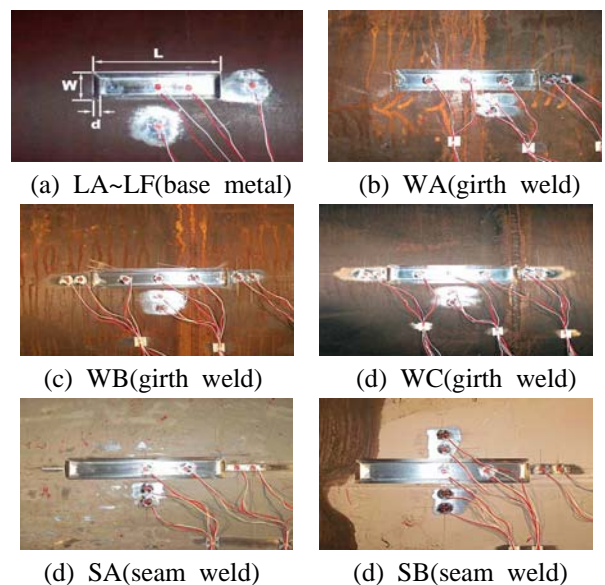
The shape and region of artificial corrosion defect within the body, the girth weld and the seam weld of pipe.
